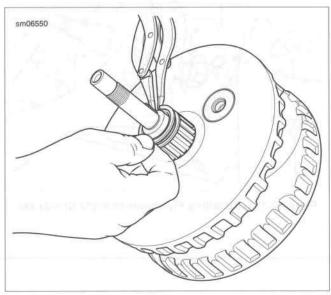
Installing Pinion Shaft Bearing and Retaining
